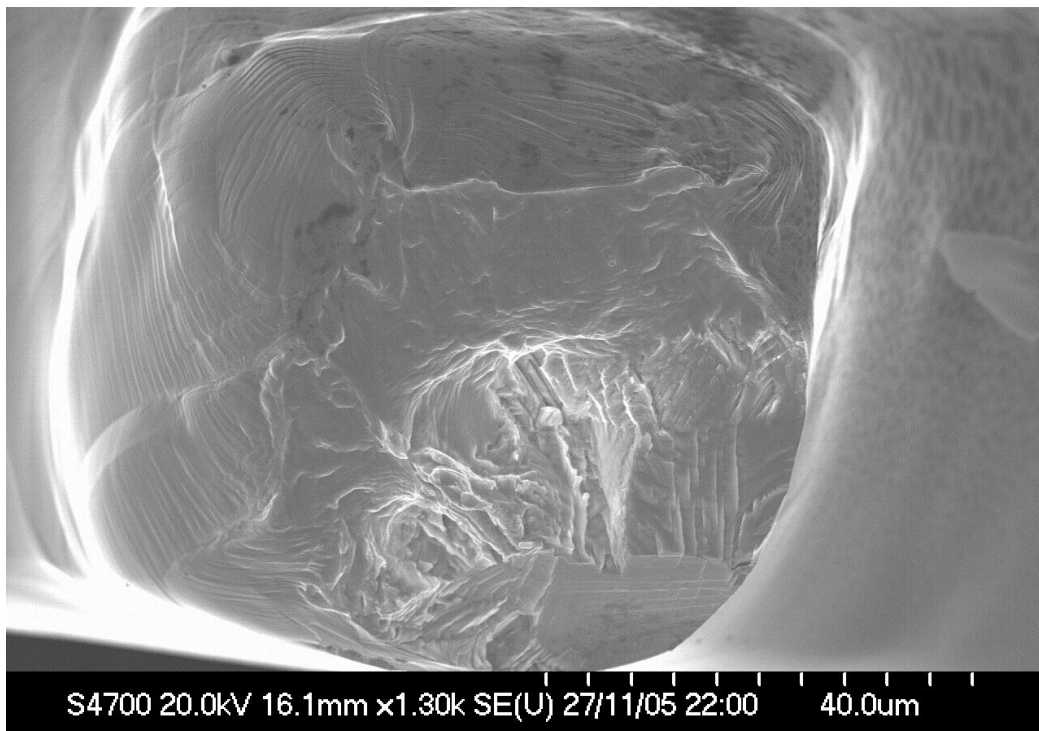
Fracture surface of CII_01_75. Specimen failed at 290,000 cycles. 75 μ m specimen.
